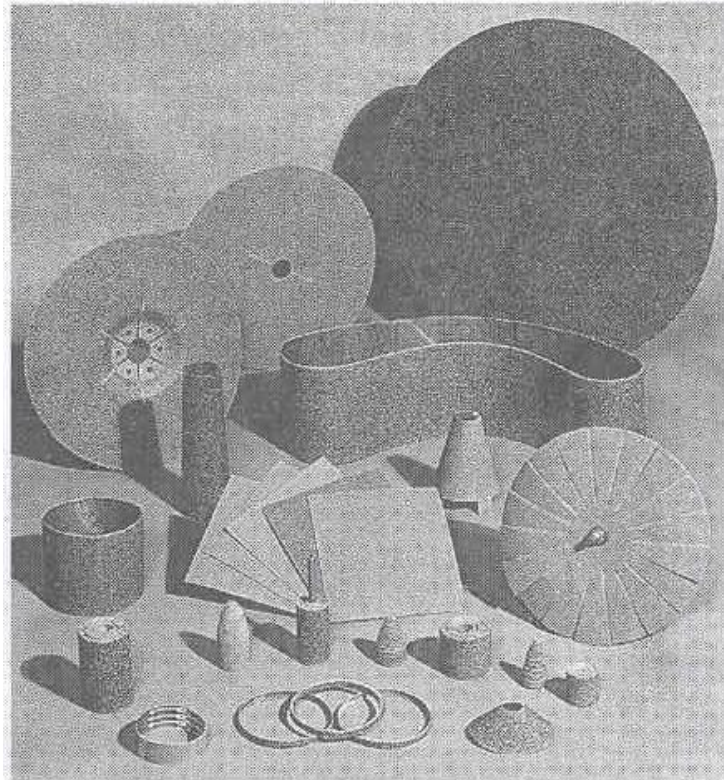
Examples of coated abrasives, belts and discs. (Courtesy of Carborundum Company.)
